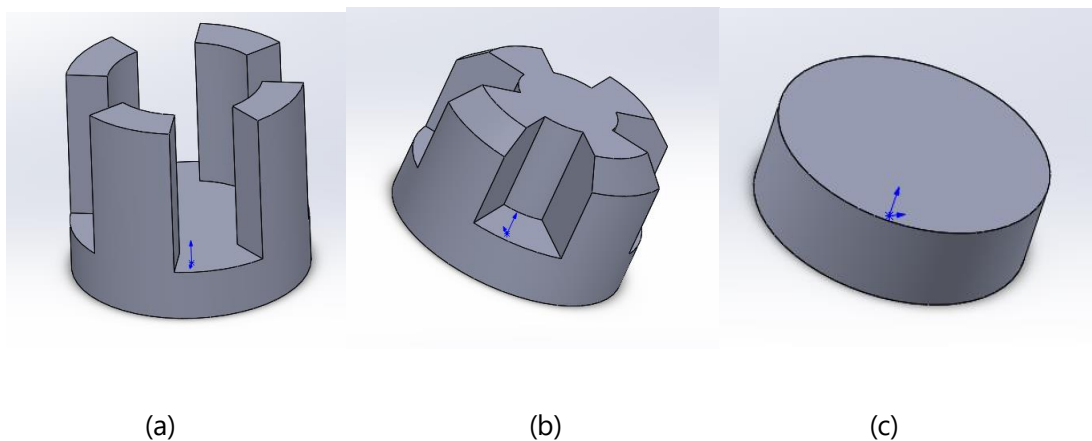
shows the 3D printed plug parts. The plugs were bonded to the yellow glass fibre tubes. The glass fibre tube dimension was smaller than the CFRP tubes. The experiment aims to test the plugs' sealing ability.
